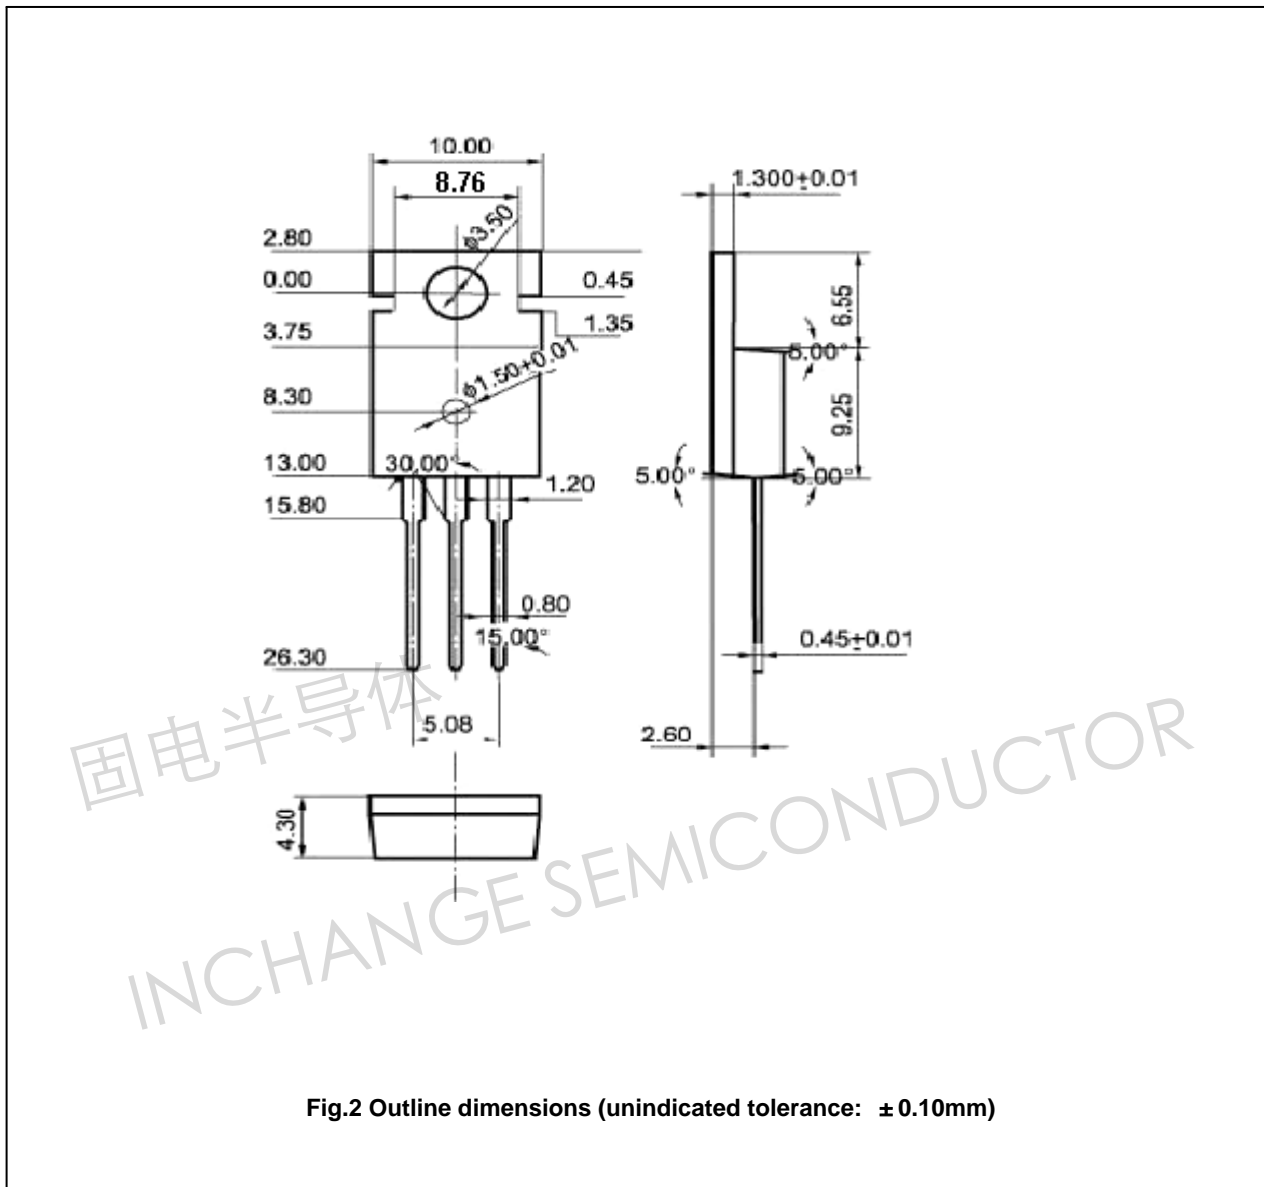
Outline dimensions (unindicated tolerance: ±0.10mm)
